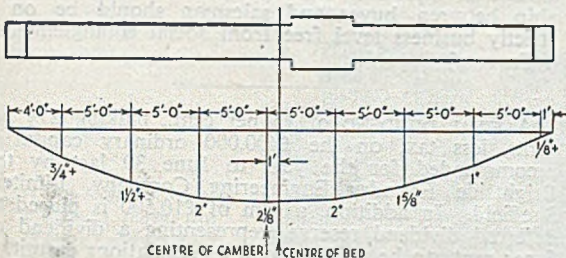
Camber Sheet Issued to Moulder for a Planing Machine Bed. Dimensions: Length, 36 ft. plus Sumps; Depth, 2 ft. 2 in.; Width, 3 ft. (Cheeks).
